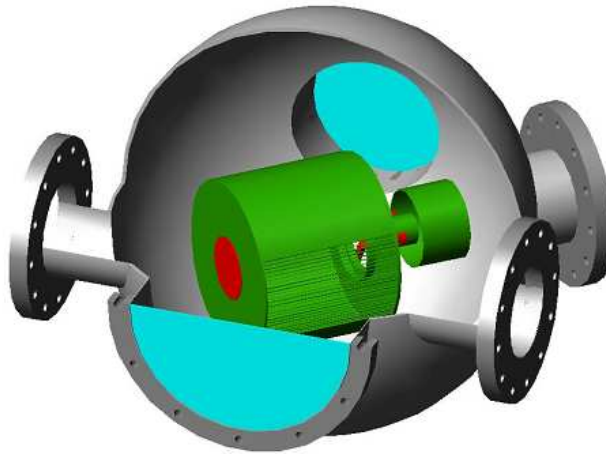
The spherical vacuum chamber prototype: internal view with the FS.
